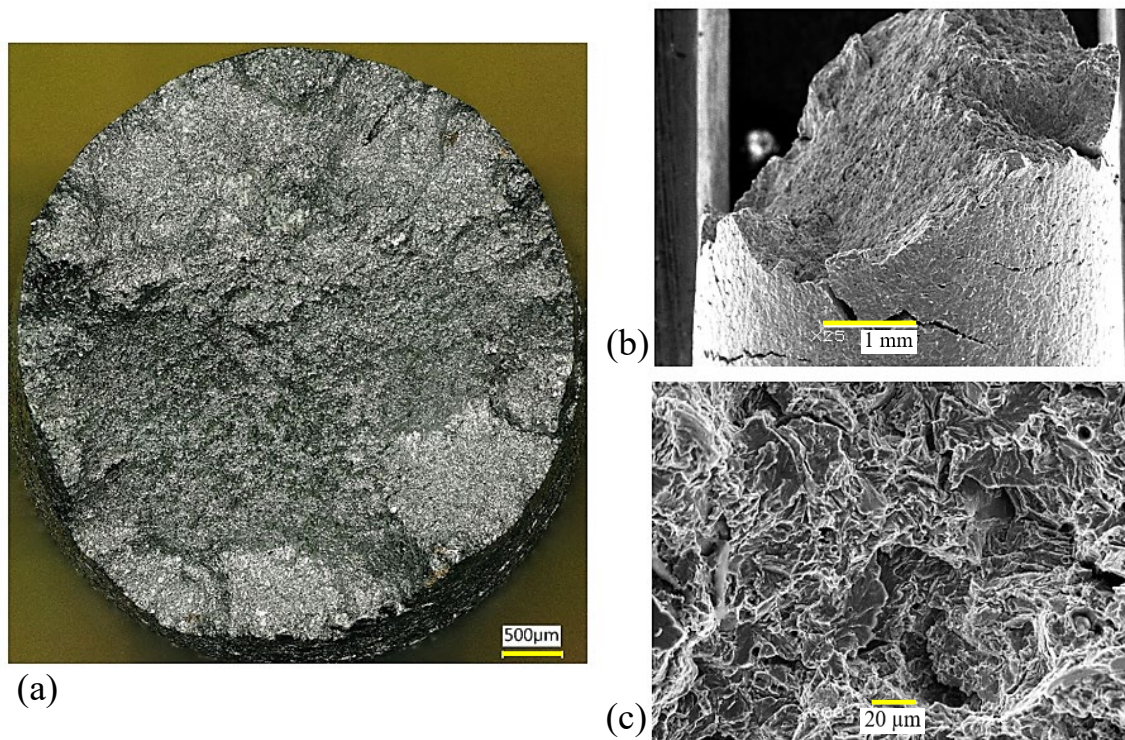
Specimen X-52 tested in high-pressure hydrogen: (a) whole fracture surface, (b) 45° slope of the fracture surface, (c) transcrystalline quasi-cleavage/cleavage fracture.
